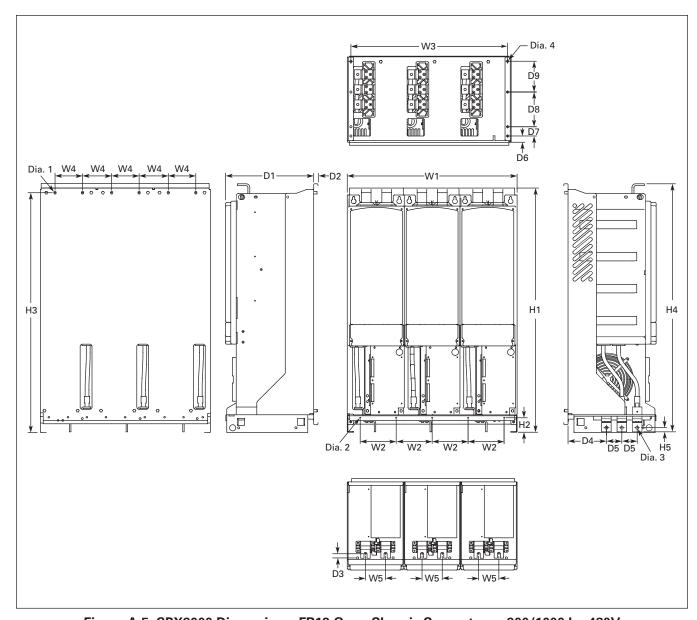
SPX9000 Dimensions, FR13 Open Chassis Converter — 900/1000 hp 480V
